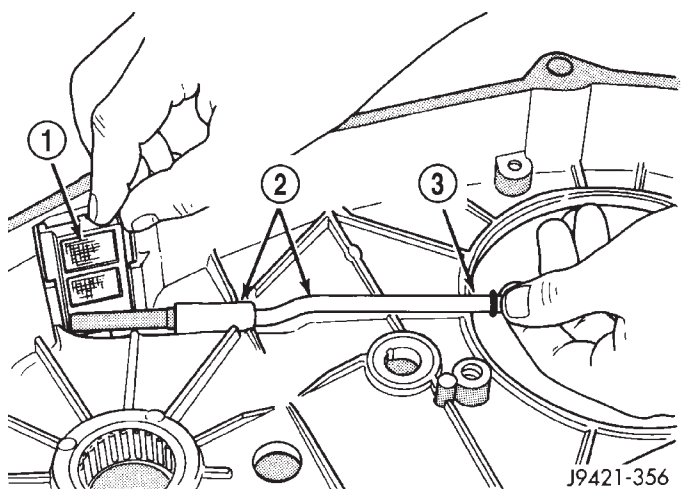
Oil Pickup Tube And Filter Position In Rear Case
